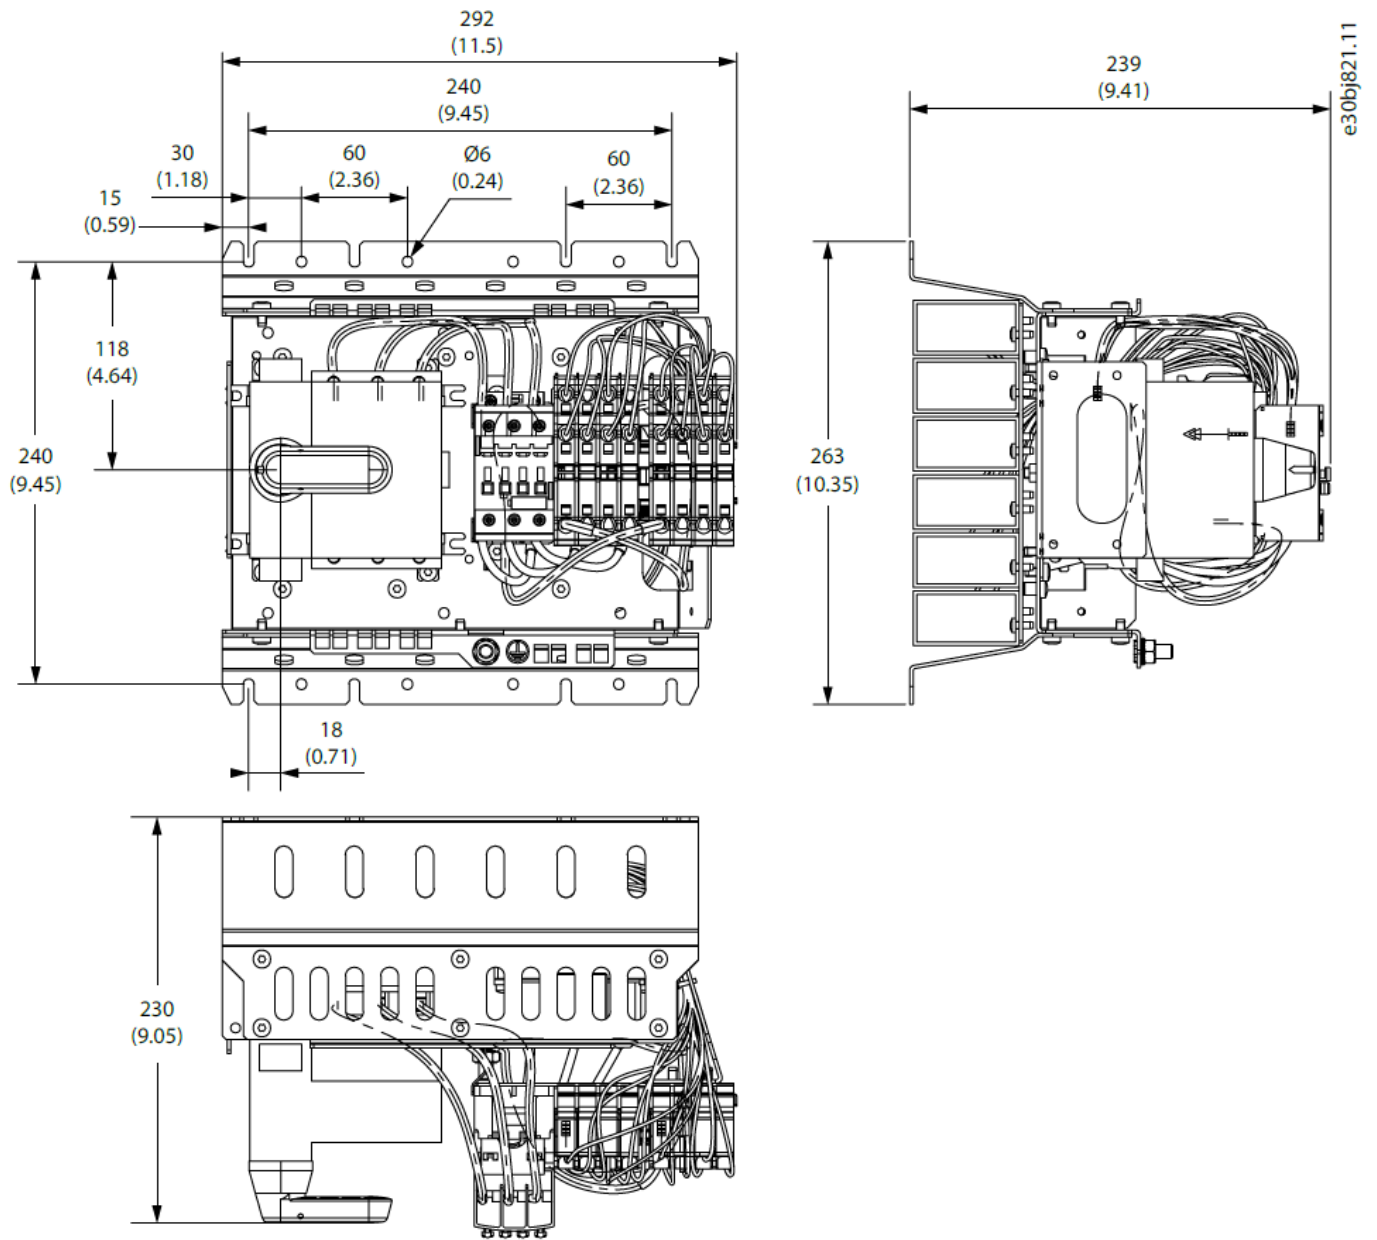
Dimensions of the Pre-charging Unit in mm (in), IEC
